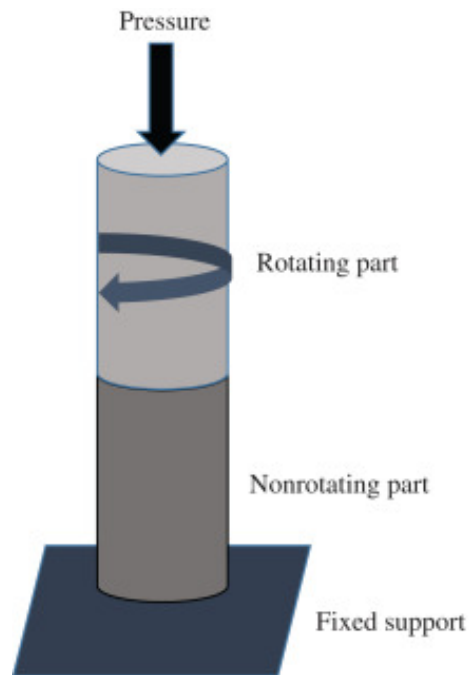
Rotary Friction Welding (Sato et al., 2015)
